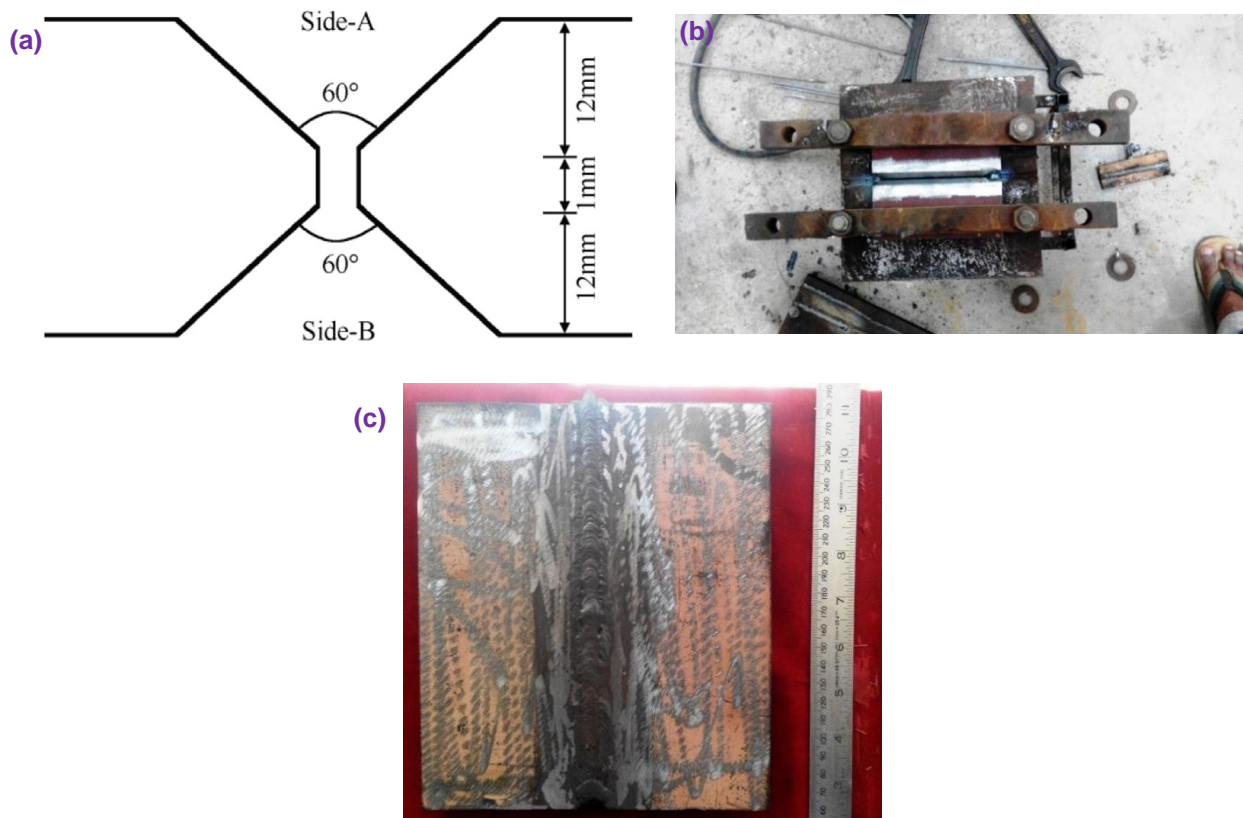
(a) Details of double V configuration, (b) Welding Fixture, (c) Fabricated P91 Joint
